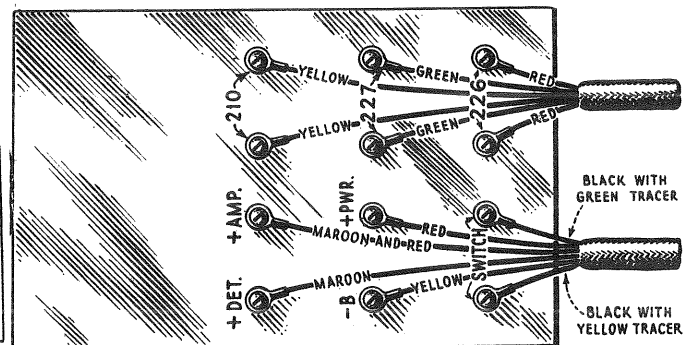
Sterling S. P. U. terminal board showing color scheme of connections
